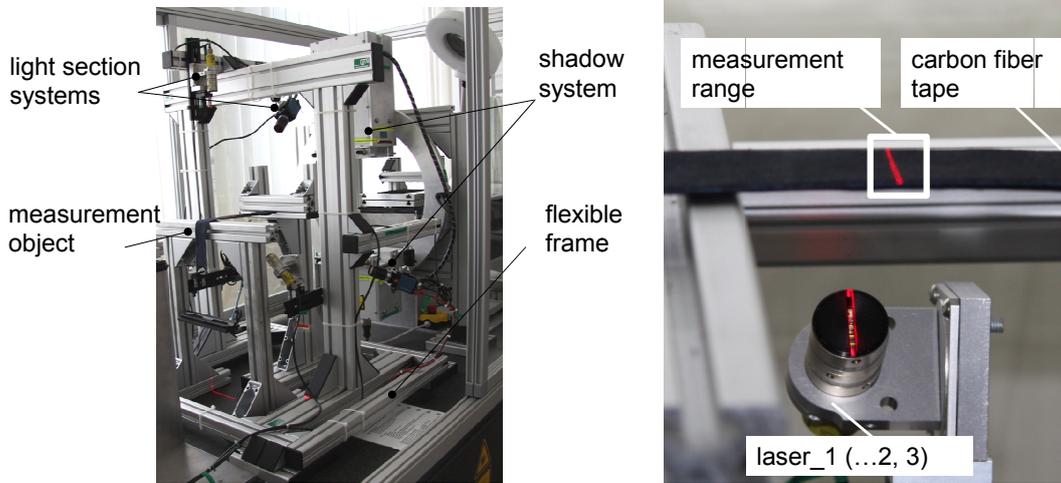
Optical bi-sensor measurement prototype, left: isometric view, right: carbon-fiber tape
